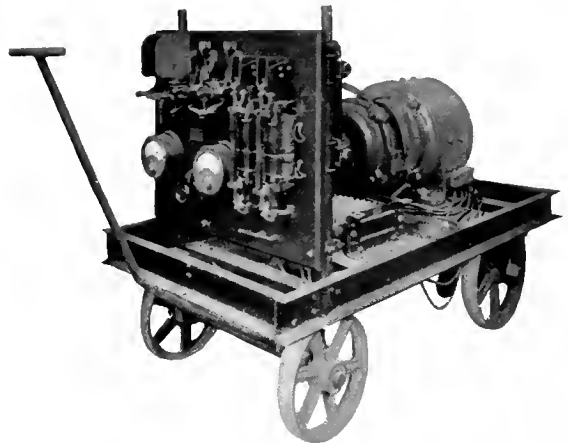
200 Ampere Arc Welding Motor-Generator Set with controlling apparatus mounted on truck to form portable equipment
